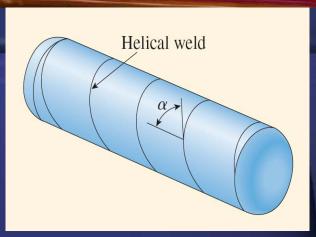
Example 8-2. Cylindrical pressure vessel with a helical weld
